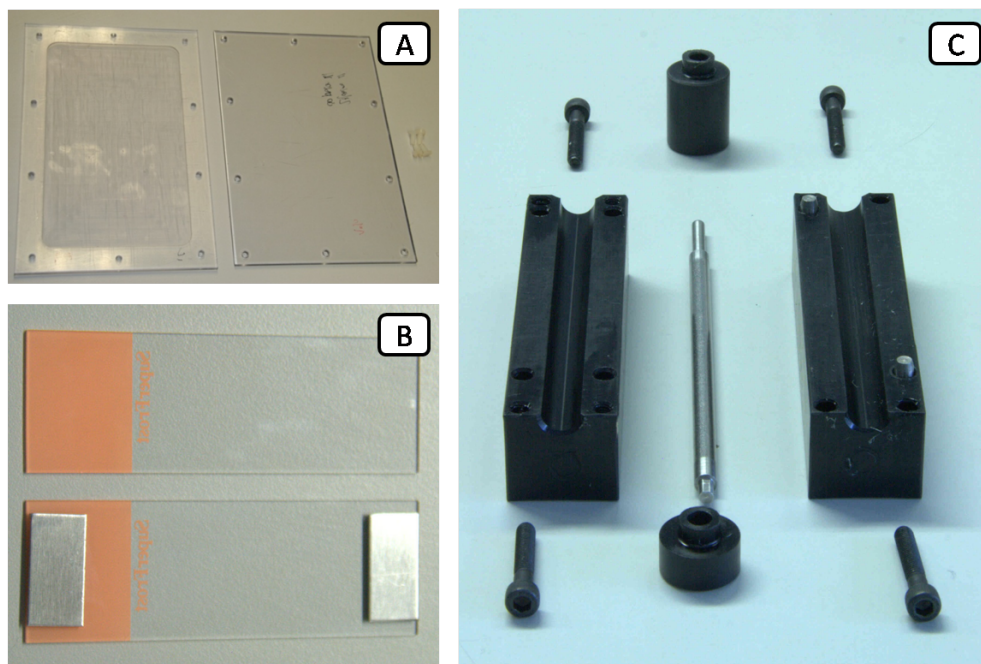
Hydrogel casting moulds. (A) Flat plastic mould; (B) Plane glass mould with spacers; (C) Tubular mould to prepare hydrogel vessel graft.
